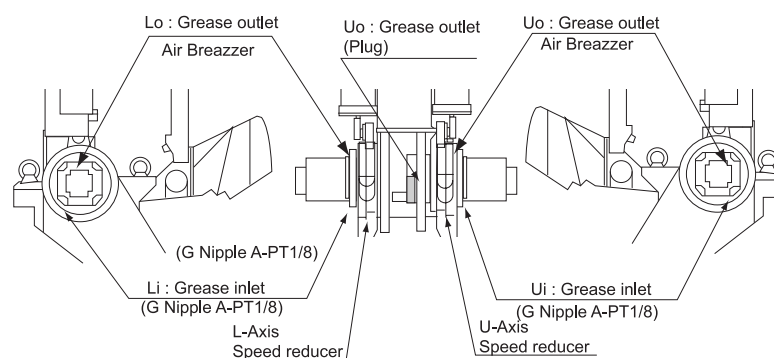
L-Axis and U-Axis Speed Reducer Diagram
